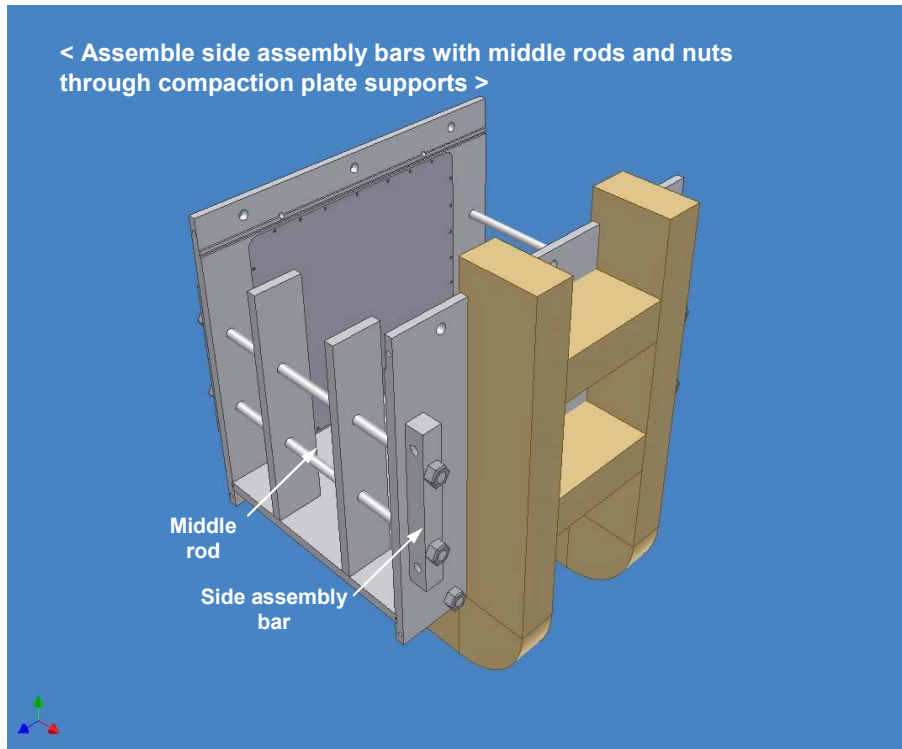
Step 5 (assemble side assembly bars with middle rods and nuts)
